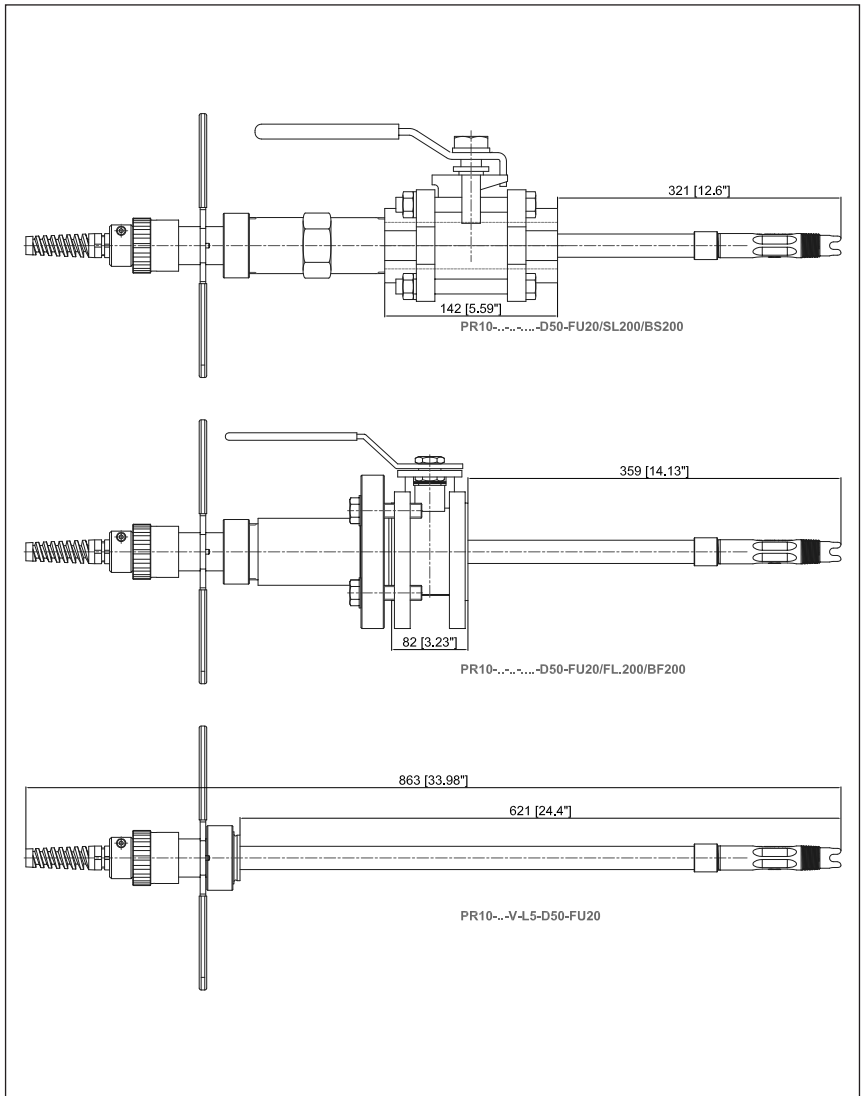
Dimensional drawing PR10...-D50 with mounted FU20 sensor
